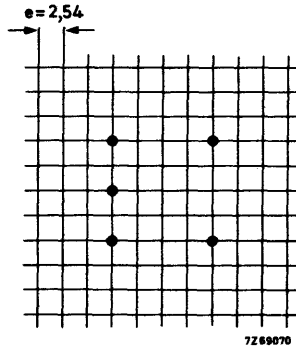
Hole pattern for mounting on a printed-wiring board, hole dia  $1,3 \pm 0,1$  mm
